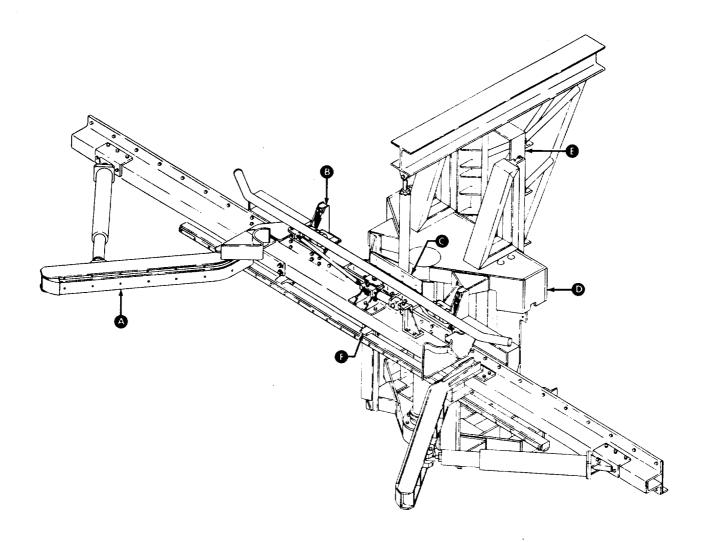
LES Coupler Assembly (Sheet 1 of 9)
